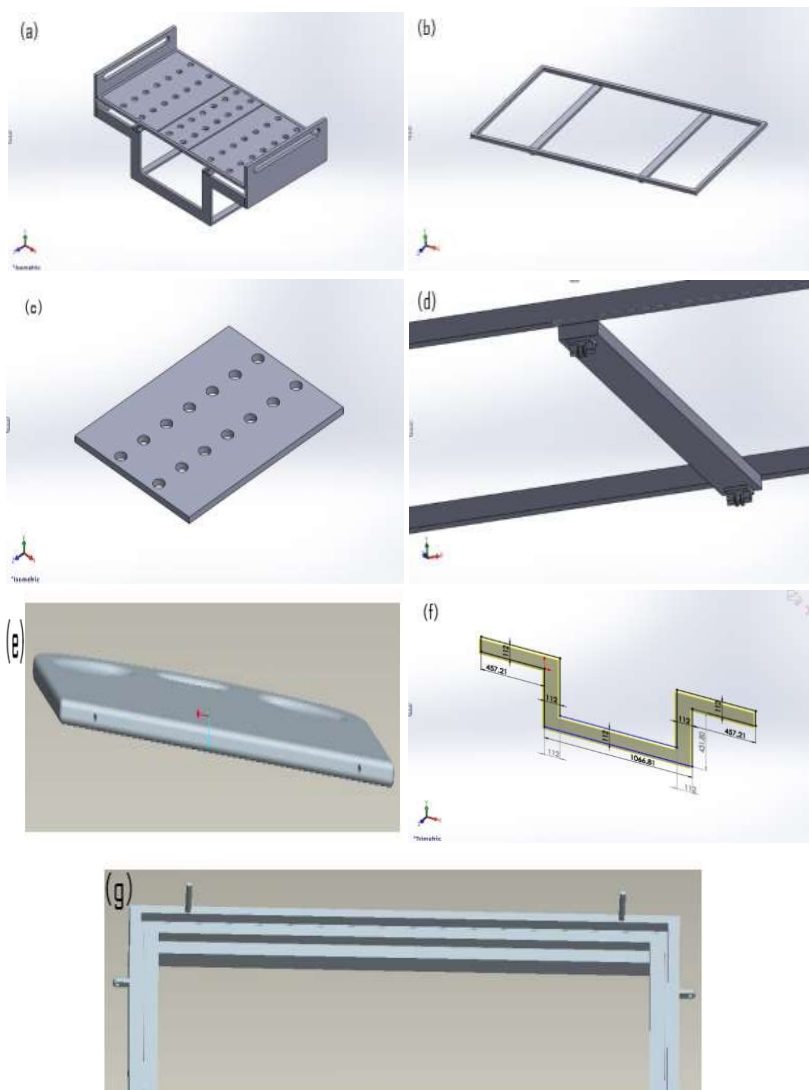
Modeling of bed parts (a) Bed Structure (b) Sleeping Surface (c) Knee Gatch (d) Sideview of the bed (e) Headboard (f) Supporting attachment (g) Frame with pins on headboard.
